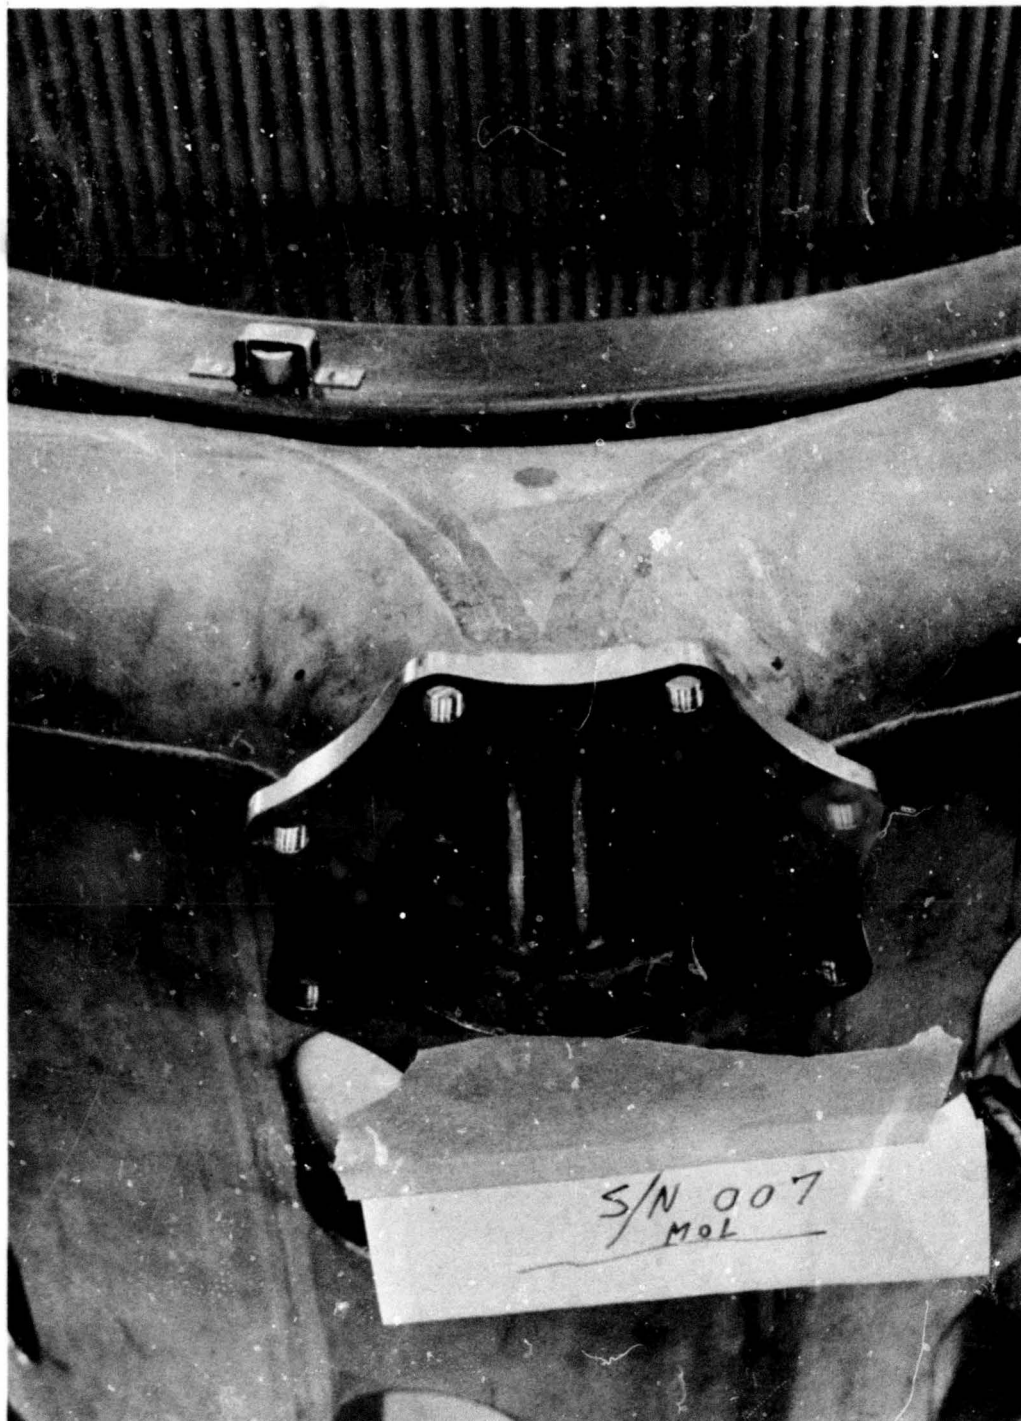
Mounting Flange and Torus Changes --- Chamber S/N 007
